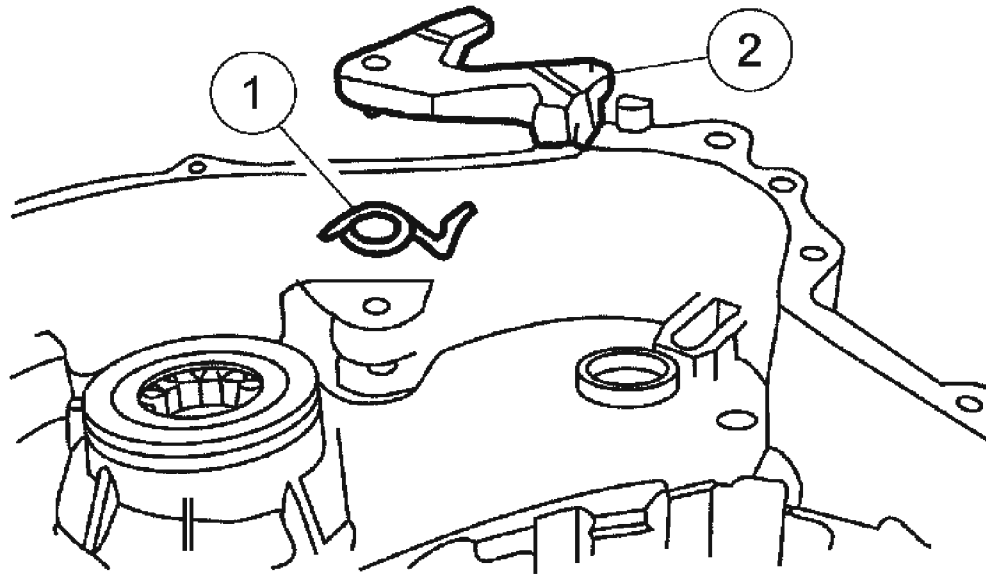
Installing Manual Valve Detent Lever Shaft Retaining Pin
